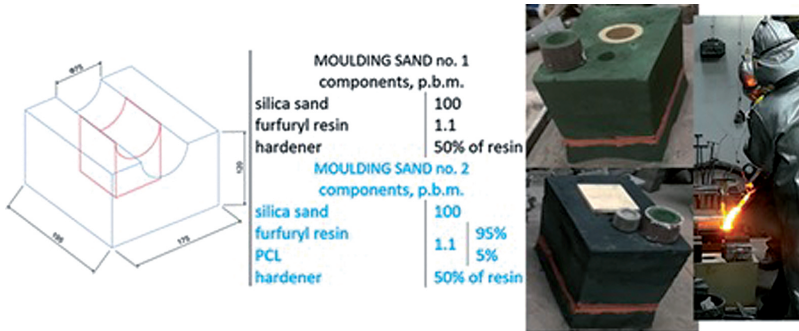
The scheme of the casting (dimensions in mm), the composition of used sand mixtures, moulds and casting process
